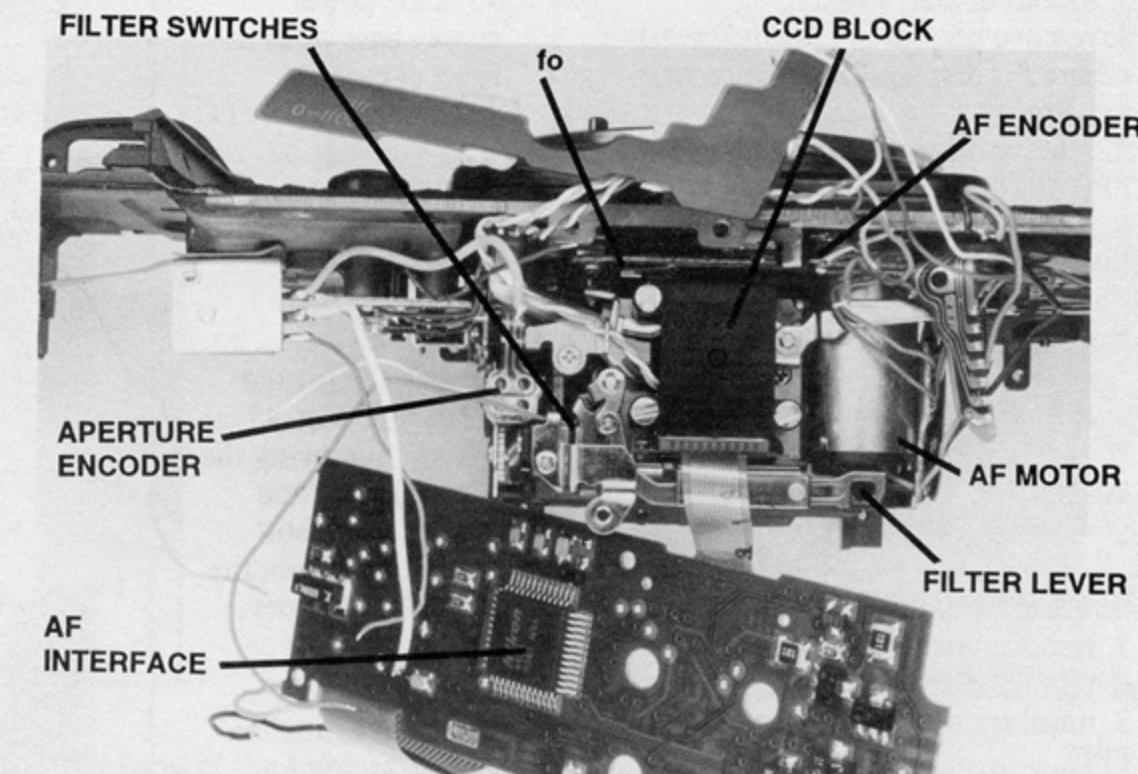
MIRROR BOX, AF BASE PLATE REMOVED
